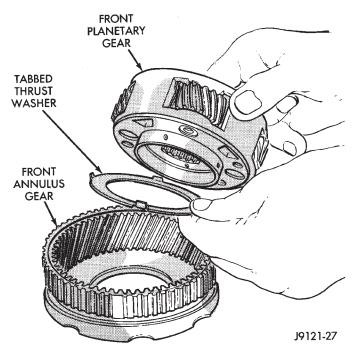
Disassembling Front Planetary And Annulus Gears—46RH
